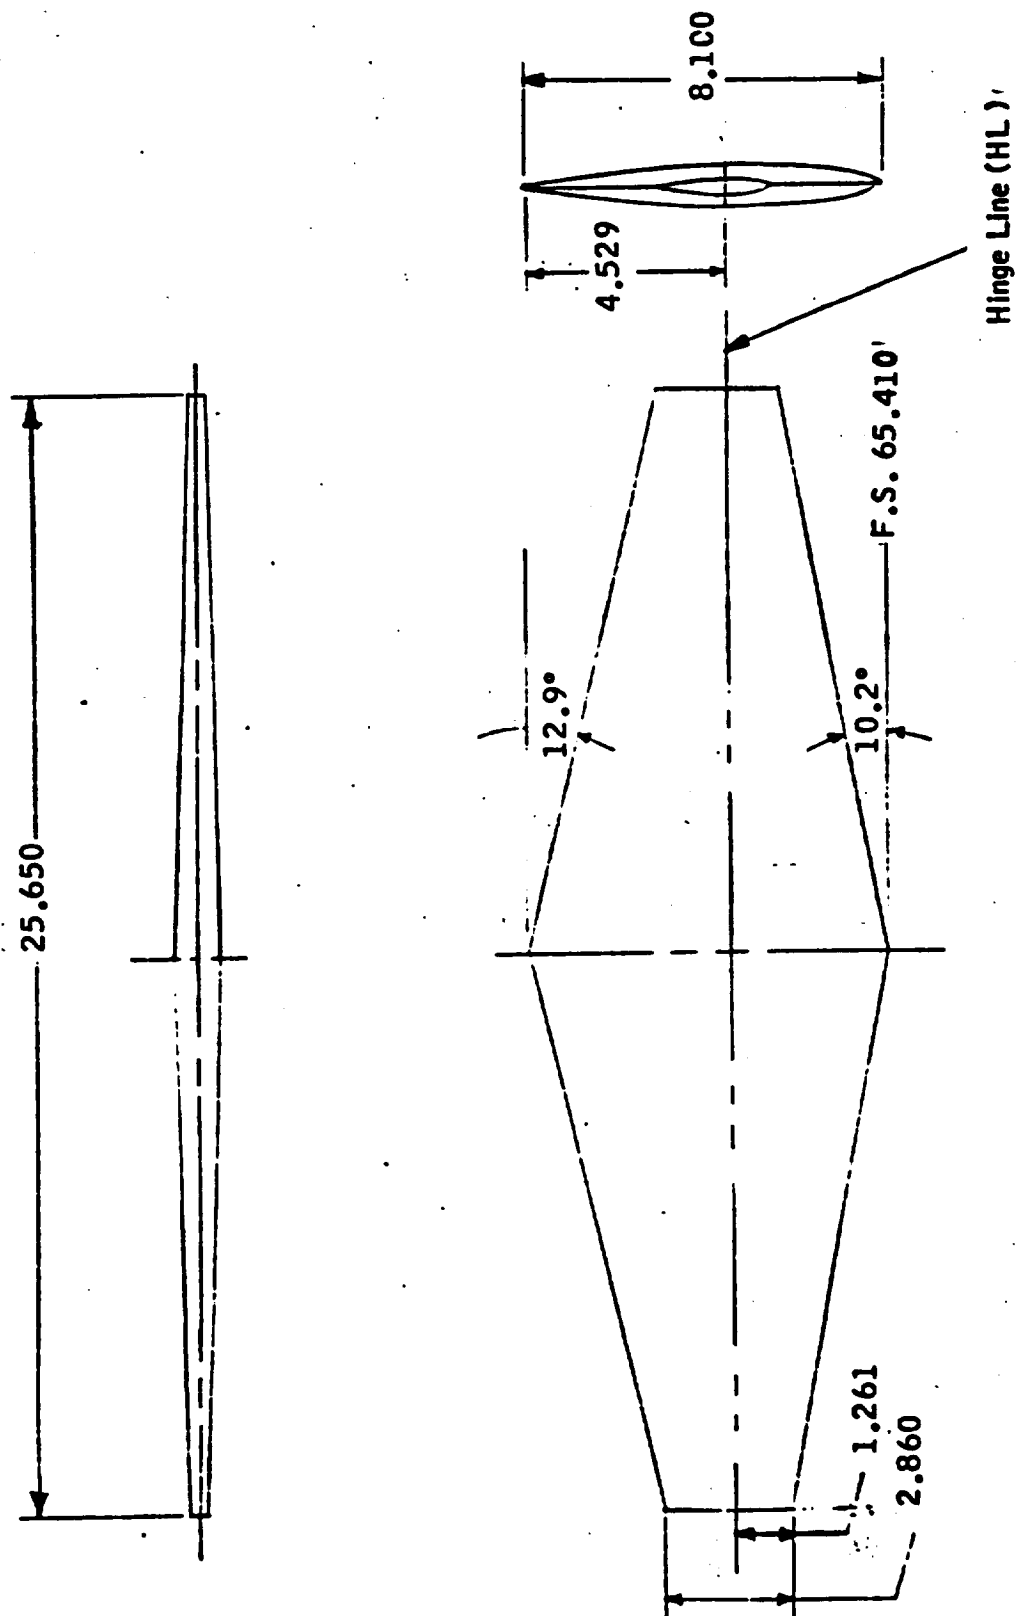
Horizontal tail H_6 (all dimensions in inches)
